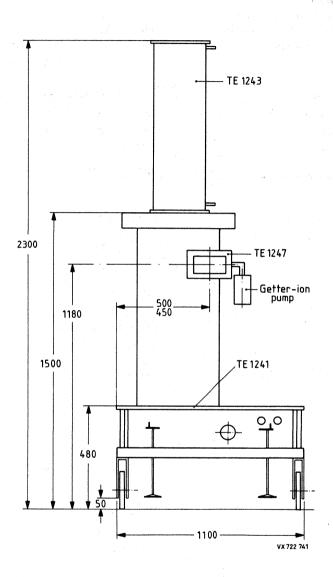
Complete assembly consisting of tube, trolley, oil tank, focus mount, r.f. transition and operational lead shieldings.
